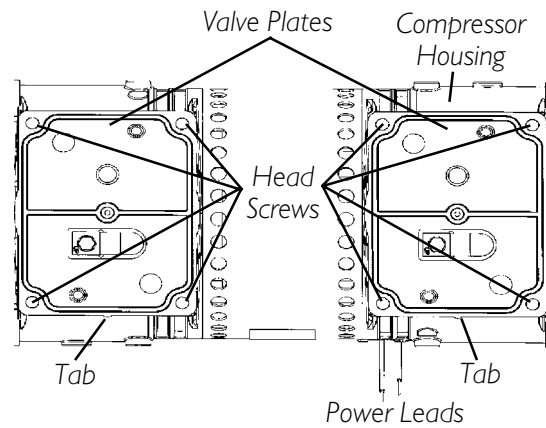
REMOVING COMPRESSOR AND COMPRESSOR HEADS
